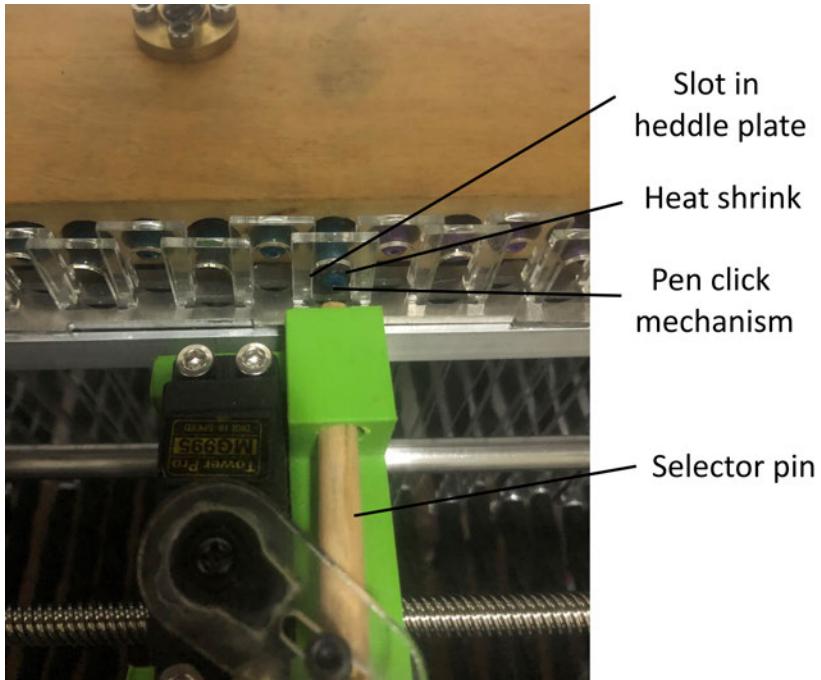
Parts that had to be in correct alignment and heat shrink on pen click mechanisms
